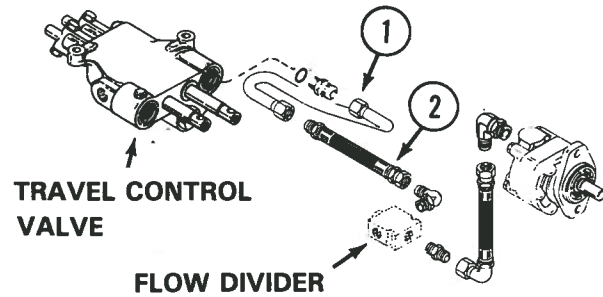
3000/4000 SERIES TRACTOR W/POWER STEERING - Travel Control Oil supply prior to Hydraulic PTO Installation.
